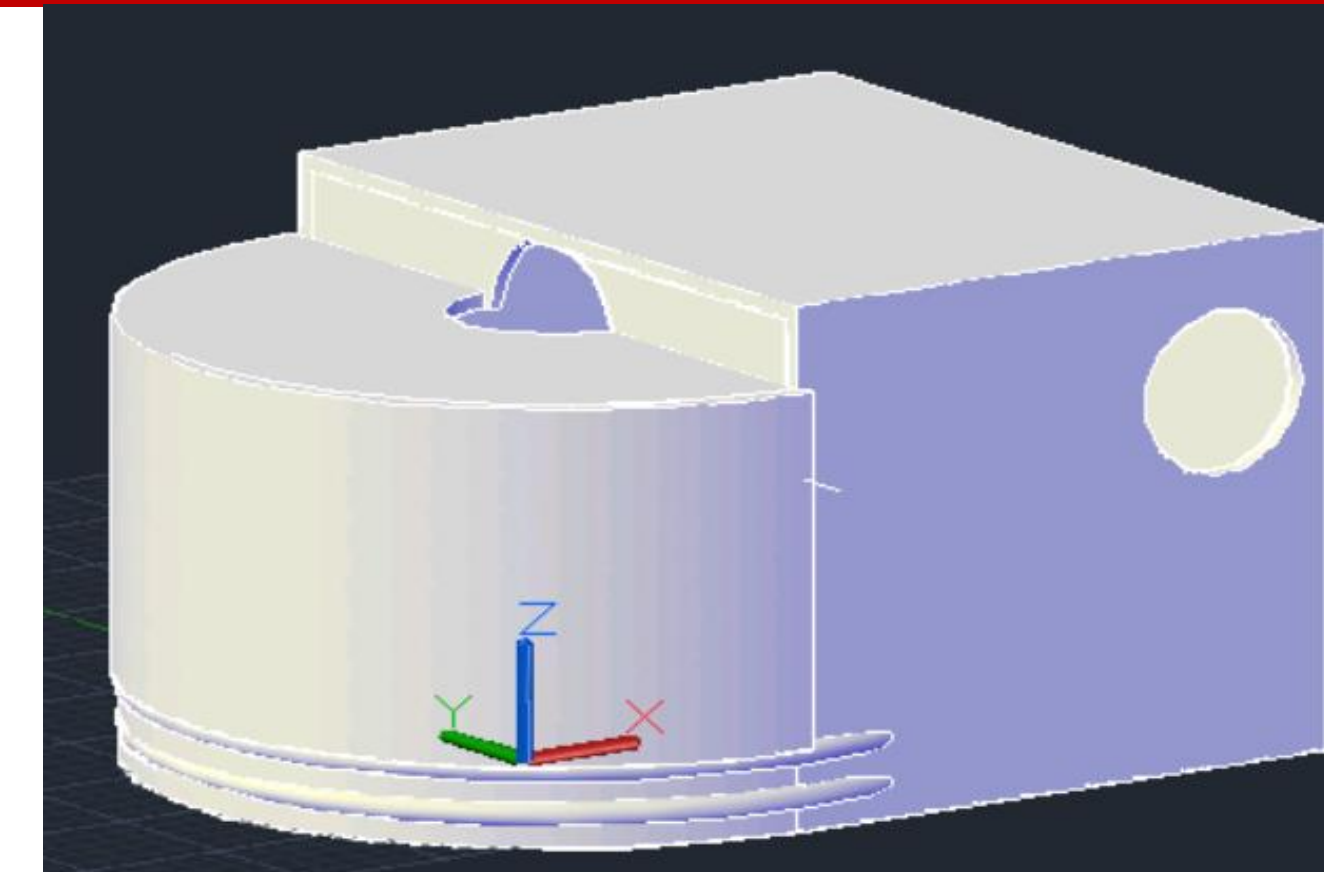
AutoCAD drawing of 2<sup>nd</sup> prototype.
